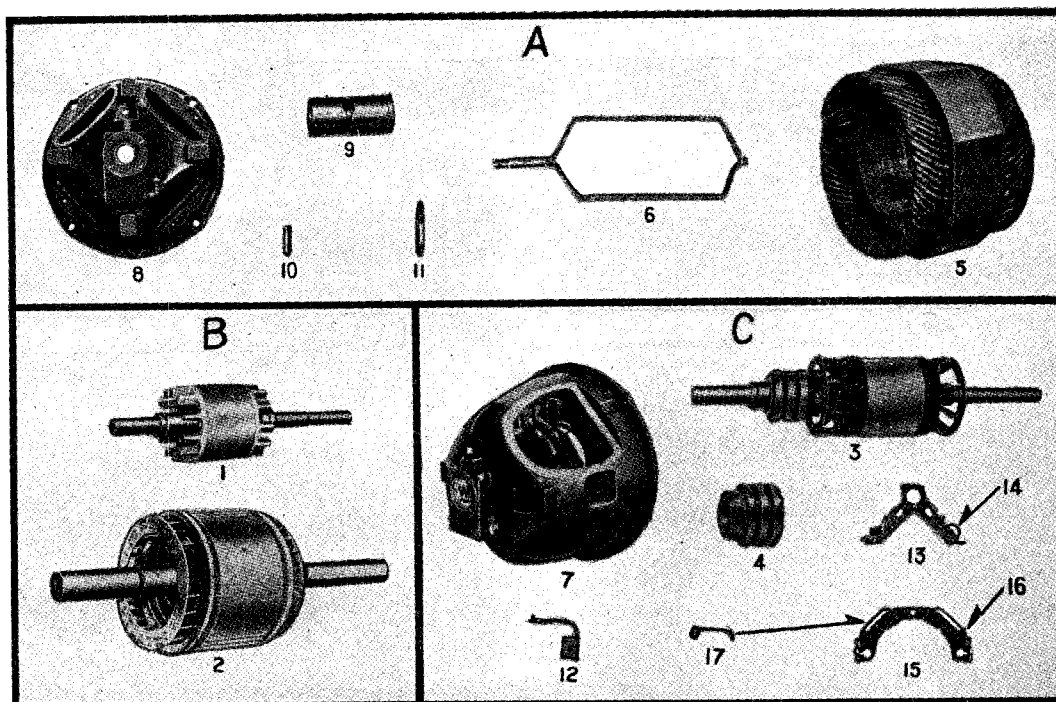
A—PARTS COMMON TO TYPES CS, CW AND CI MOTORS
